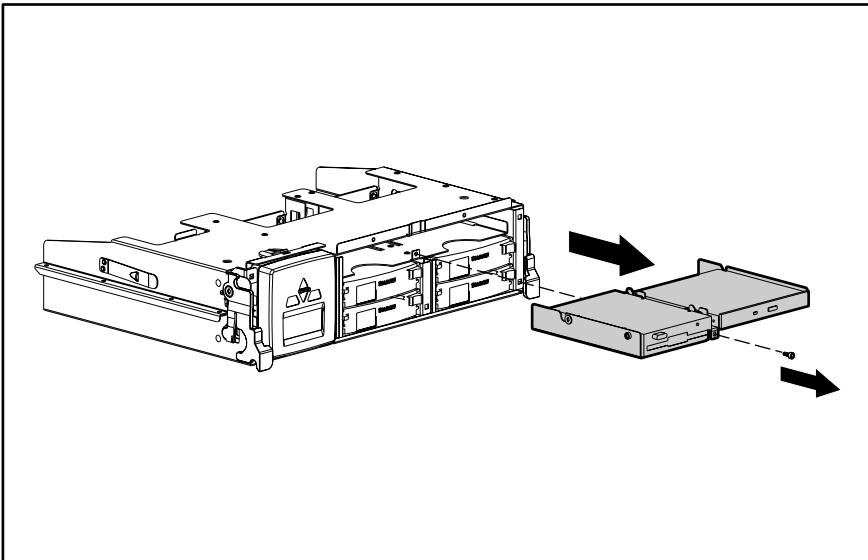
Removing the integrated diskette drive and CD-ROM drive
